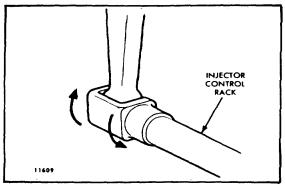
Checking Rotating Movement of Injector Control Rack
